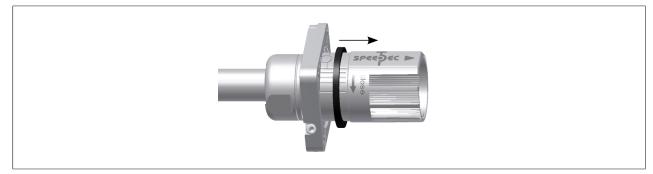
Attaching the metal flange to the connector (rear panel installation)
